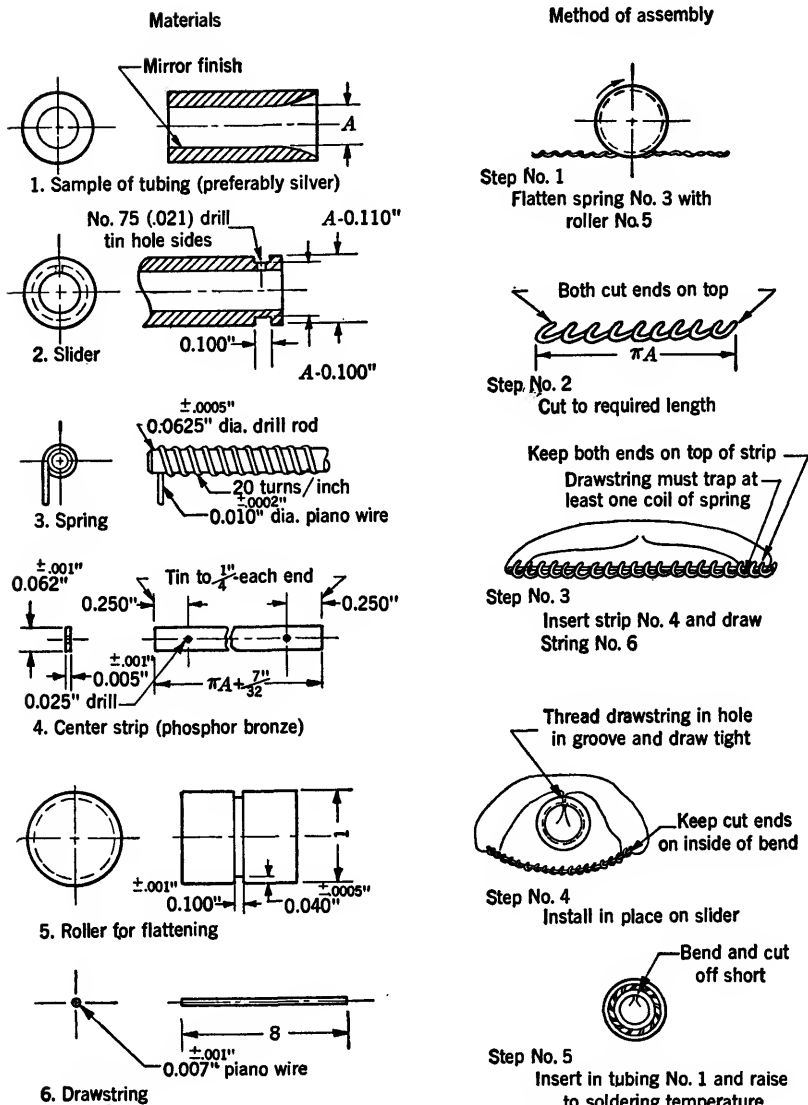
Method of constructing helical-spring r-f contacts.
